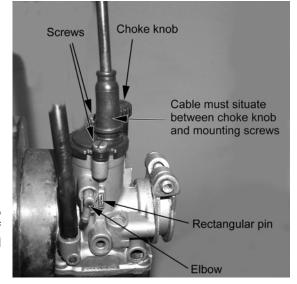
Proper carburetor top installation and location of rectangular slide indexing pin and vent elbows.
